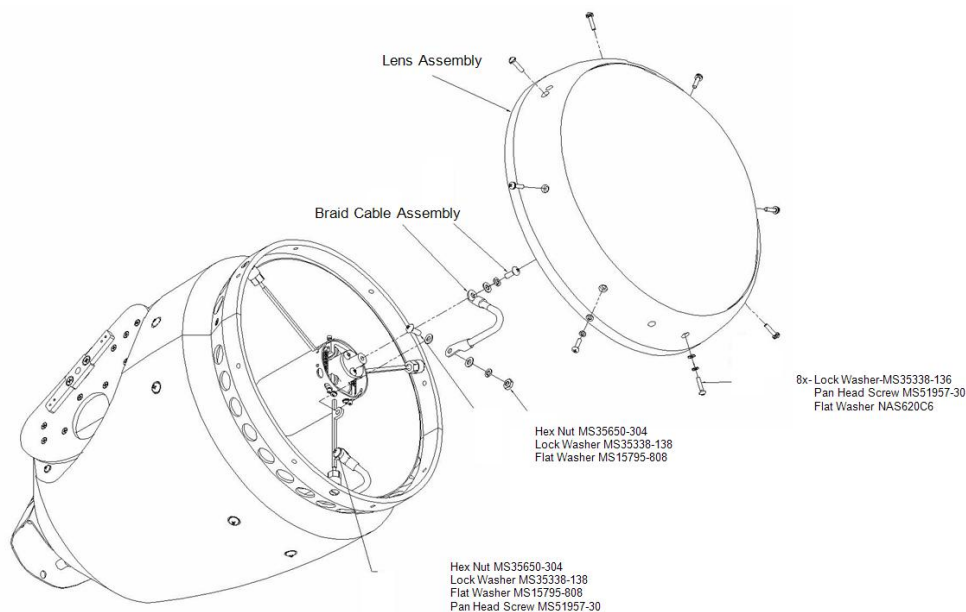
Lens Assembly, Searchlight Housing, and Spider Assembly
